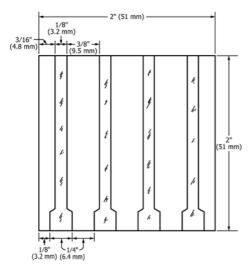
Test Specimen for Peel Strength and Solder Float Tests
